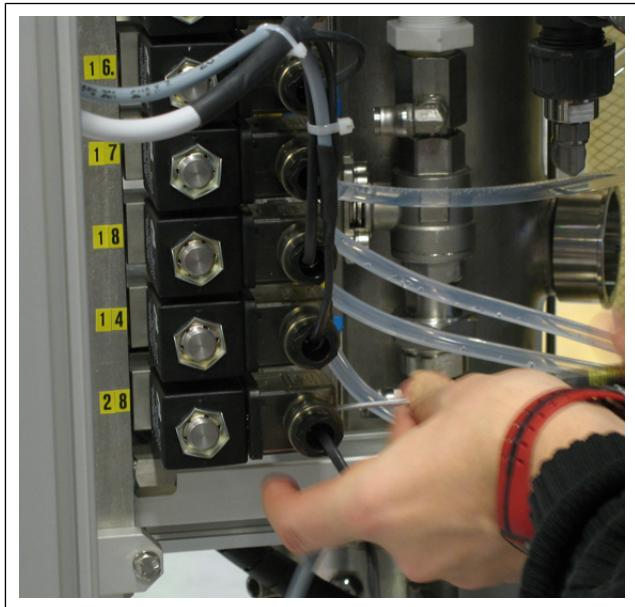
Adding a solenoid valve for water, and attaching its cap.
